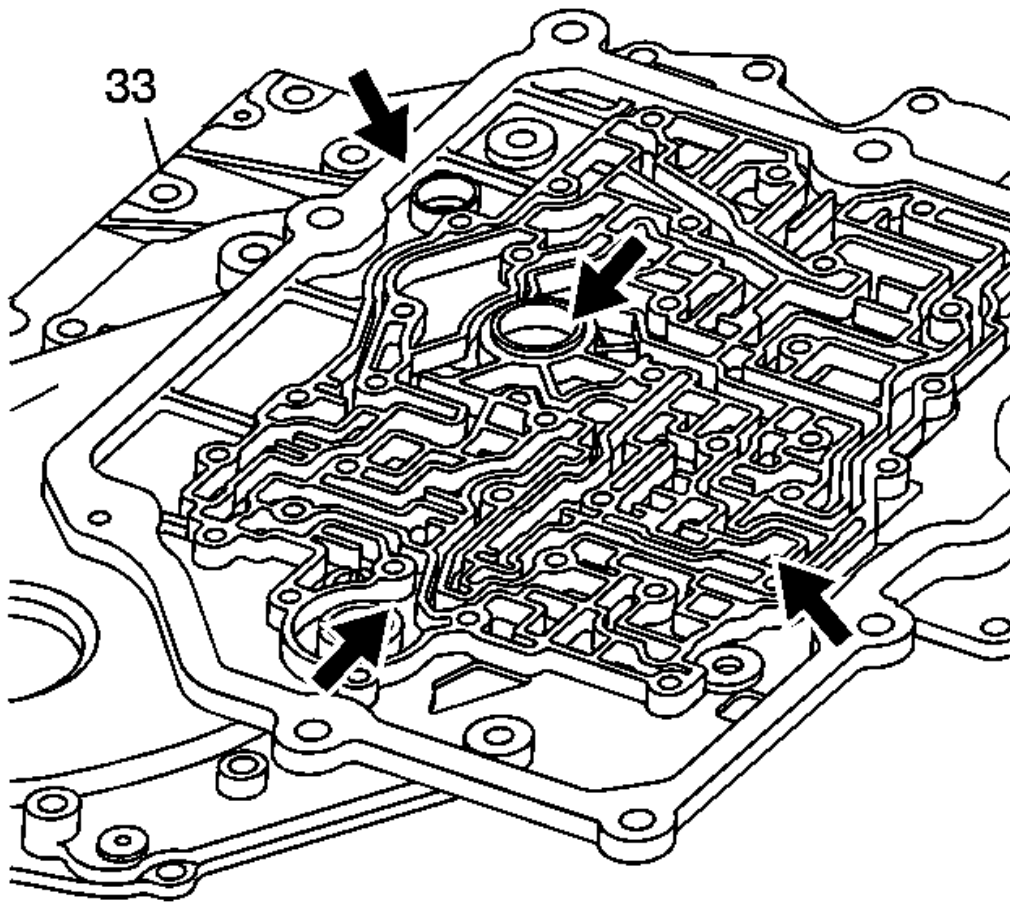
Identifying Case Cover Mating Surface Inspection Areas
